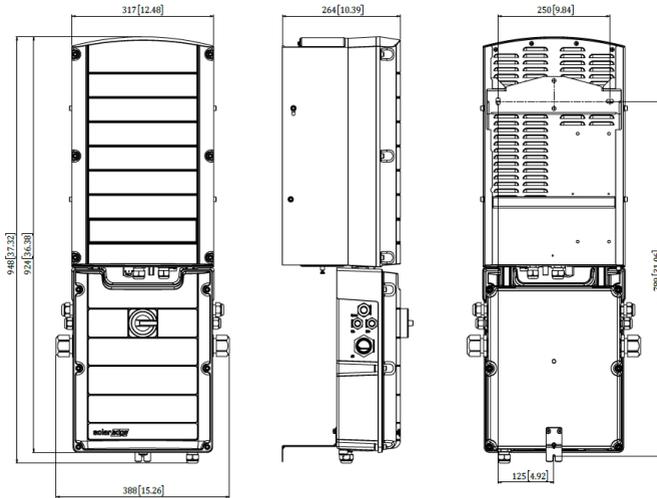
Primary Unit and Connection Unit - front, side and rear views
